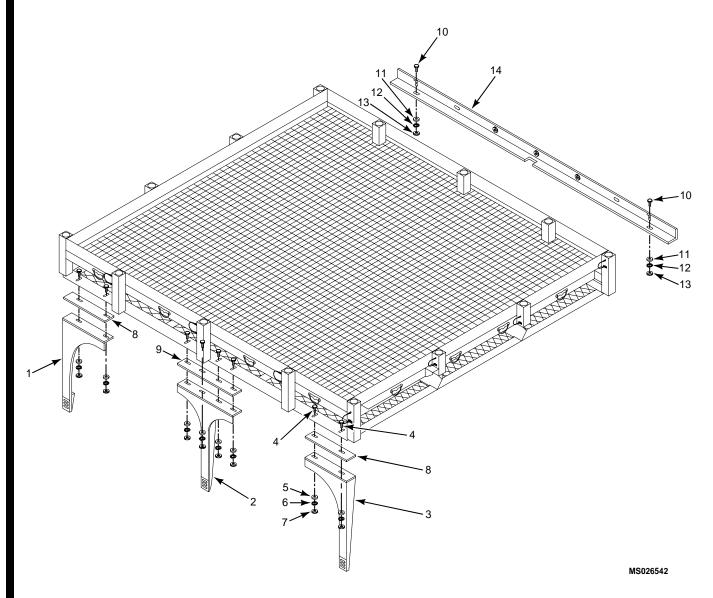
Overhead Cargo/Maintenance Rack Assembly Removal
